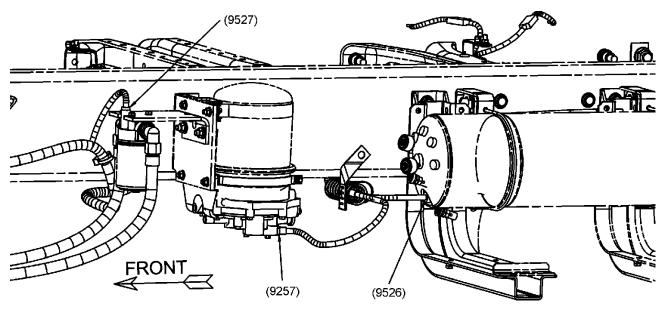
Air Dryer And Heated Drain Valve Wiring (Right Side Shown)
